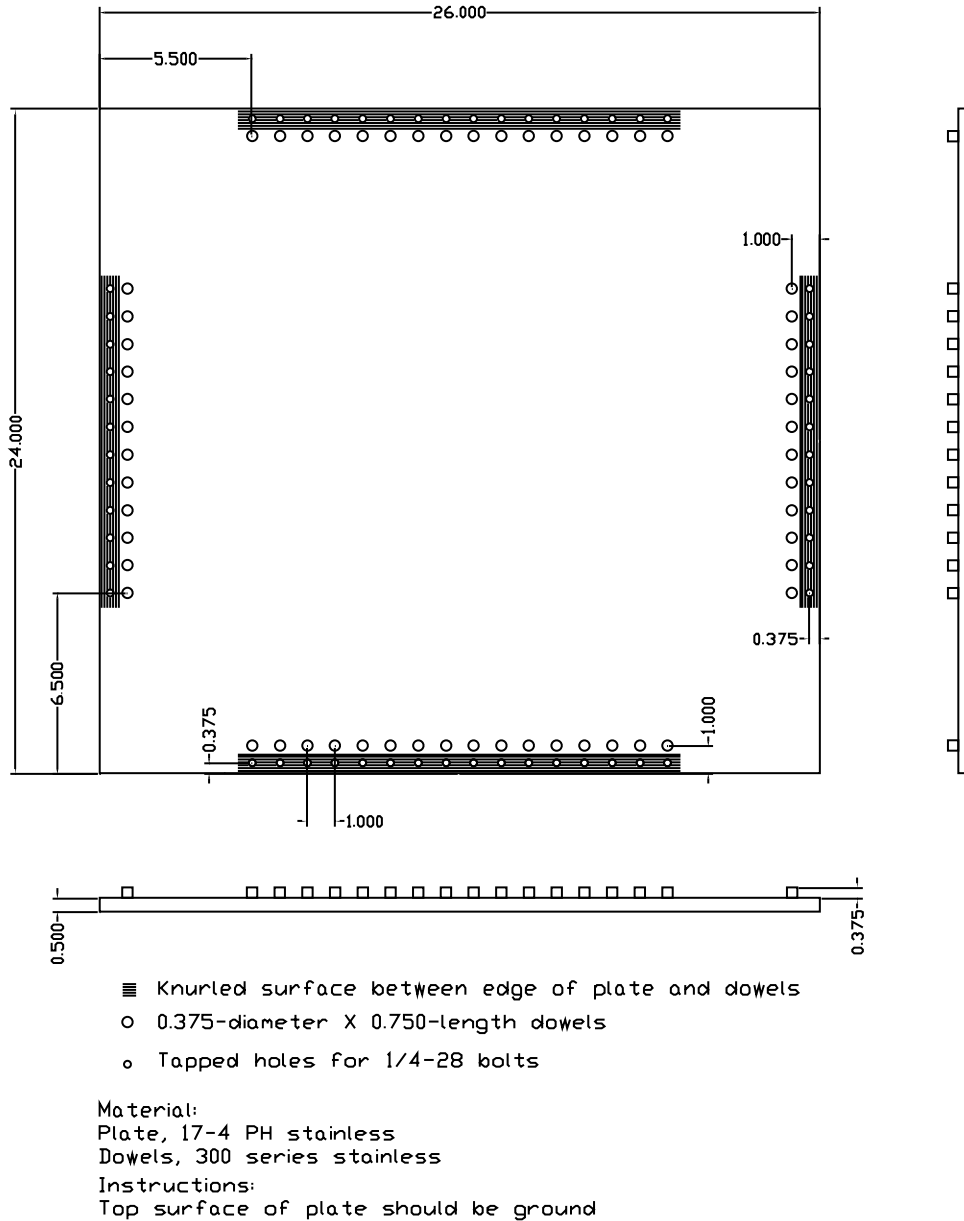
Mechanical drawing of the laminate lay-up and cure tooling apparatus (all dimensions in inches).
